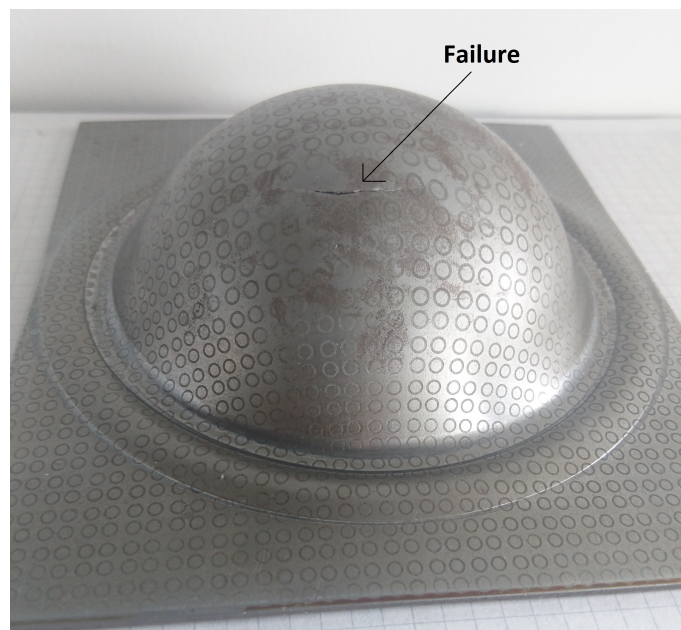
150 mm wide specimen, where the failure after the test is shown in detail
